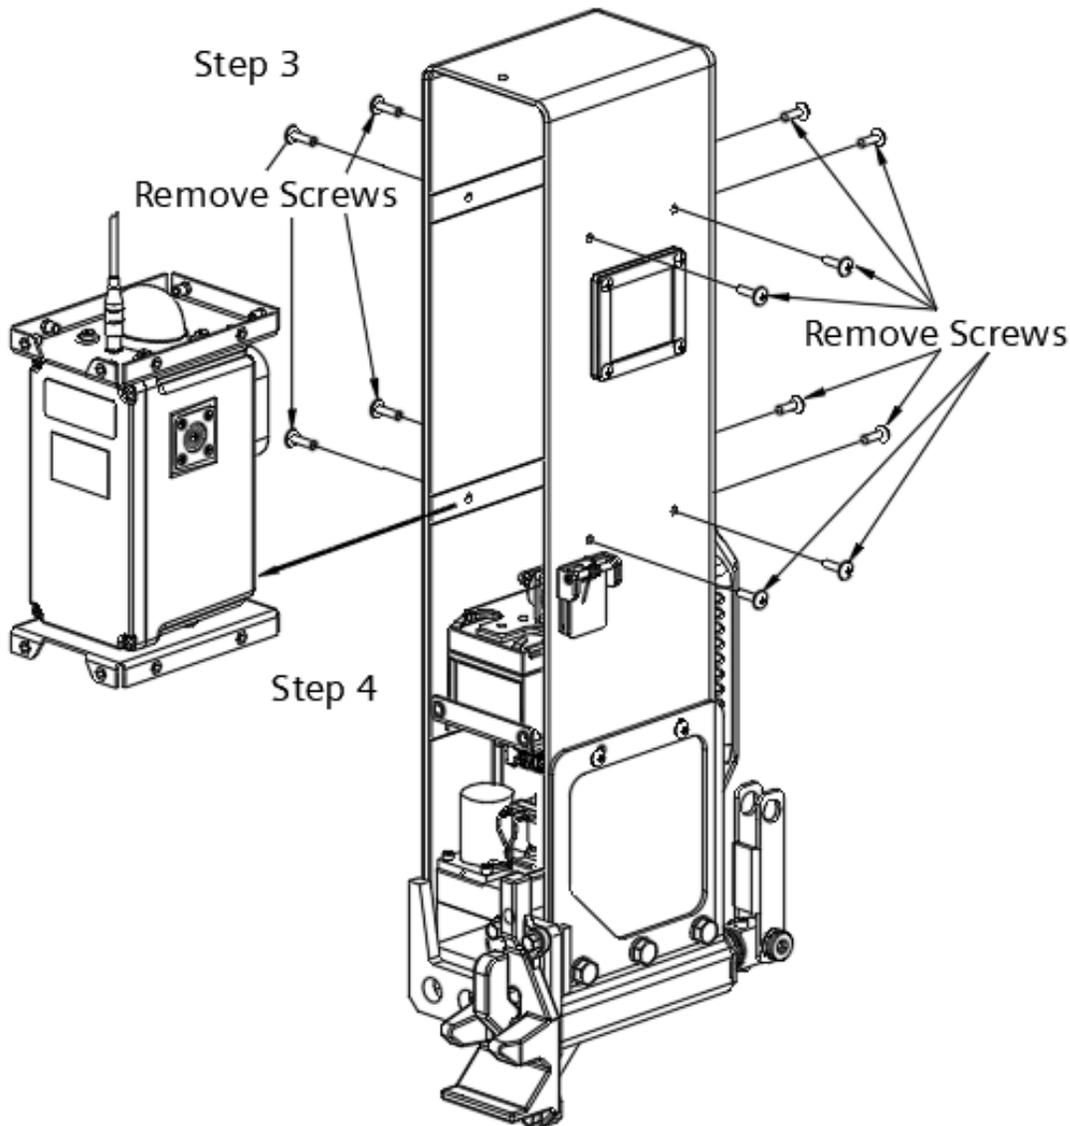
Remove Electronic Box Assembly from EOT Chassis
